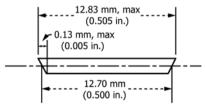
Tension Test Specimens for Sheet, Plate, and Molded Plastics
